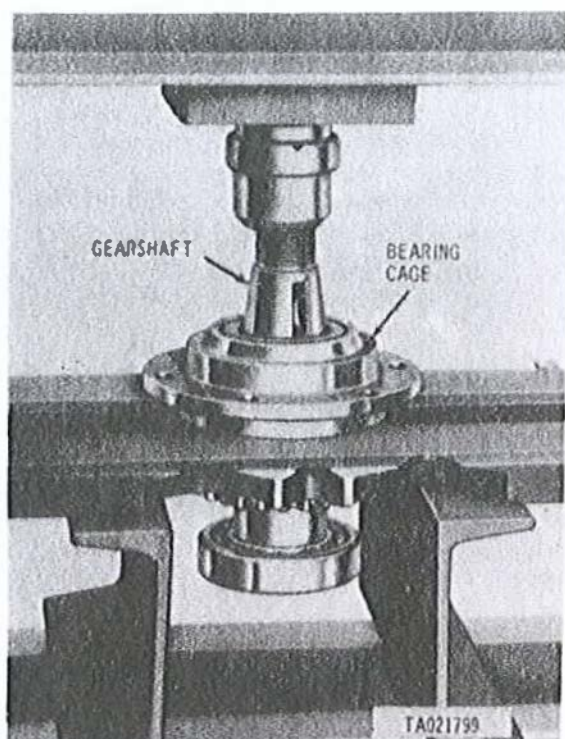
Pressing starter driven gearshaft and bearings from bearing cage.
